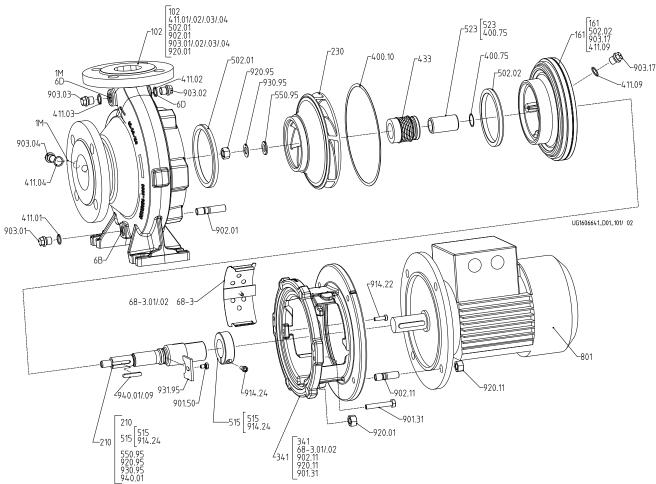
Model with single mechanical seal and clamped casing cover, with pump foot
